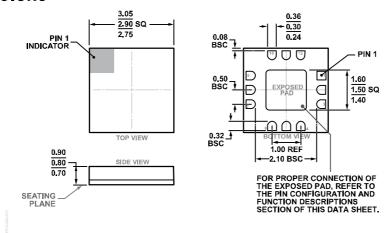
12-Terminal Ceramic Leadless Chip Carrier [LCC] (E-12-4)Dimensions shown in millimeters
